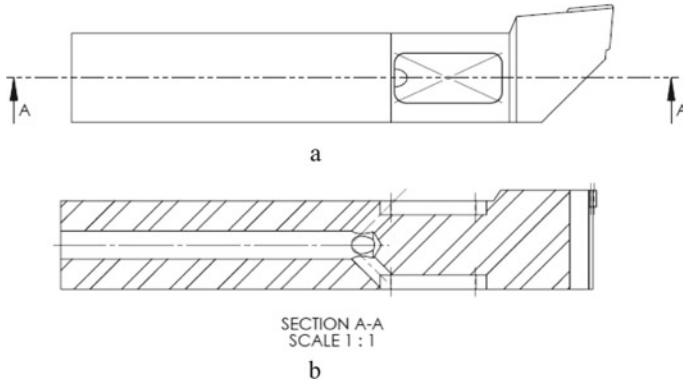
Diagram of the tool holder. a Top view; b front section view
